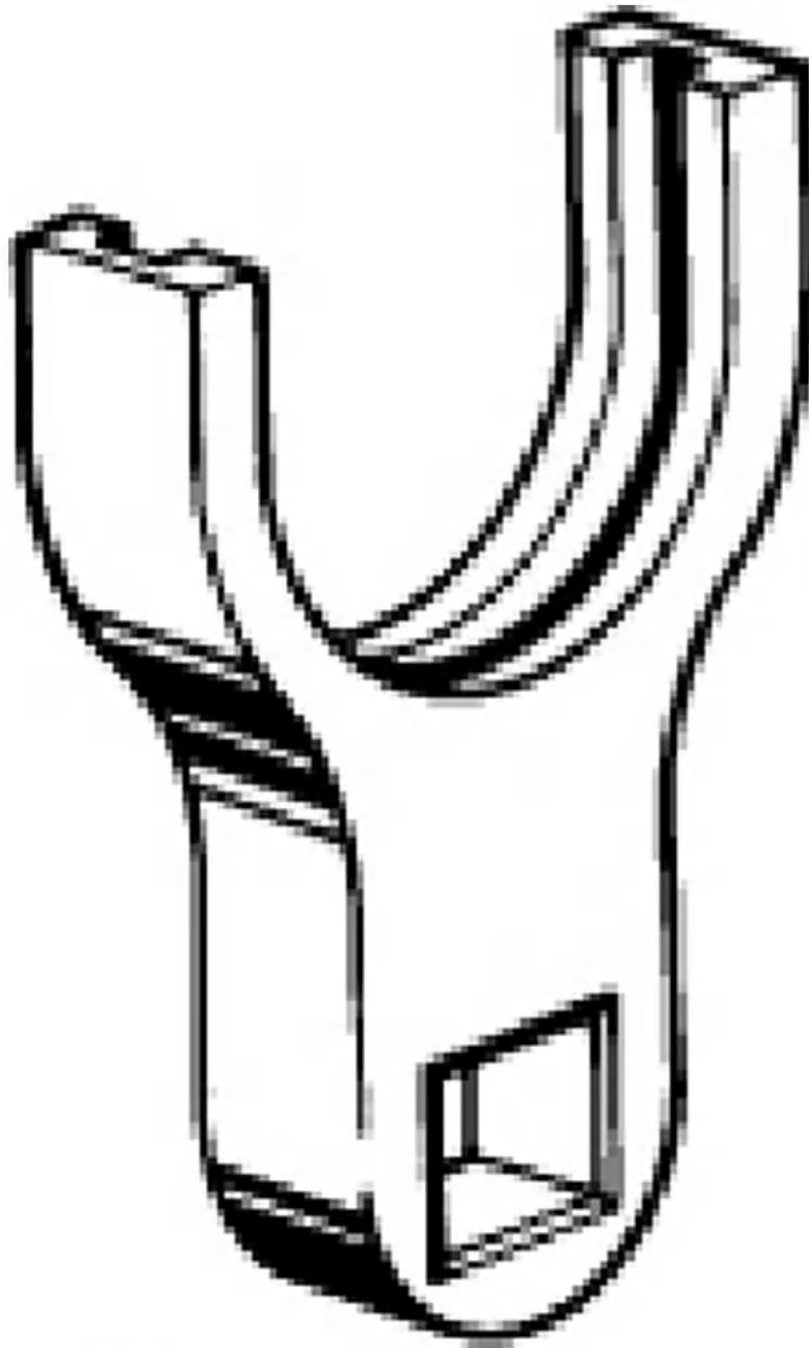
Identifying Special Tool 26 1 030 Fixture For Checking And Adjusting Diffraction Angle Of Propeller Shaft](#)
